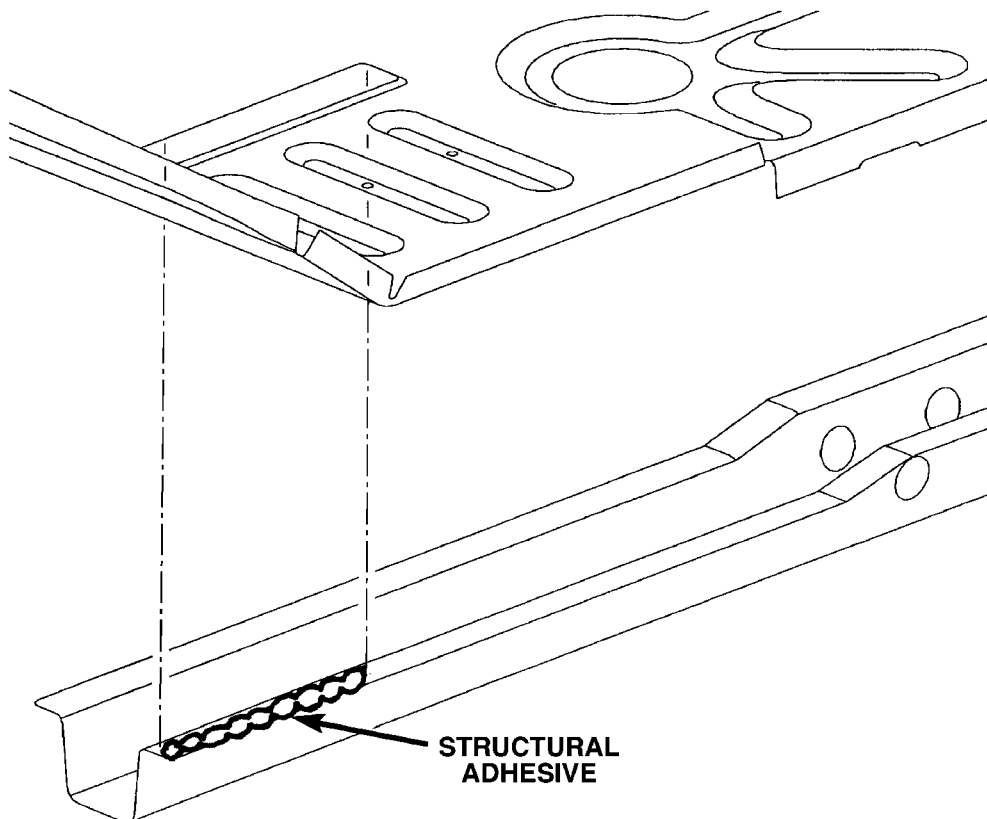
TRUNK AND REAR WHEELHOUSE AREA
